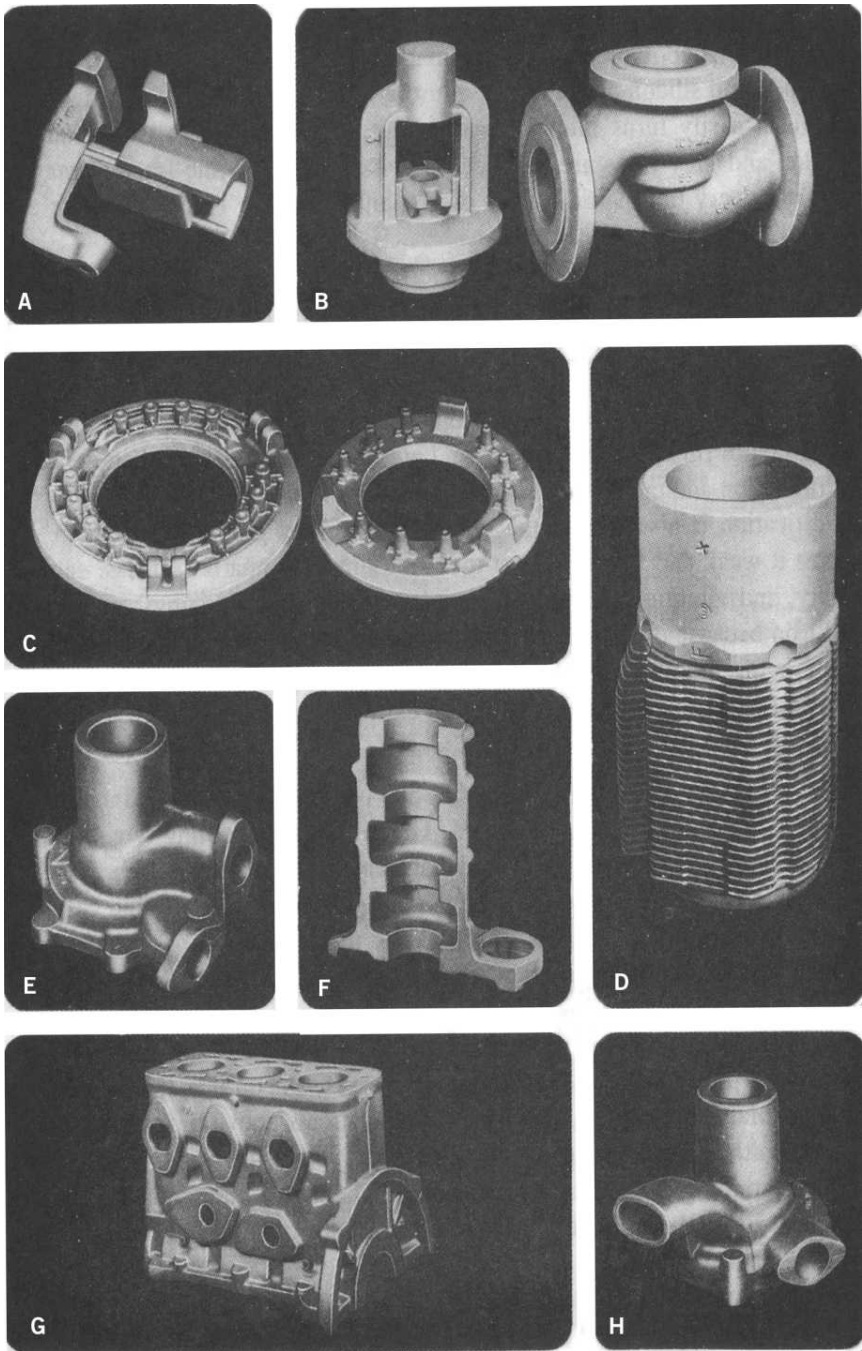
Sand castings in grey iron (A) Vice (B) Value body and bonnet (C) Clutch thrust plate (D) Finned cylinder (E) Water pump body (F) Crank base (G) Cylinder block (H) Pump body
